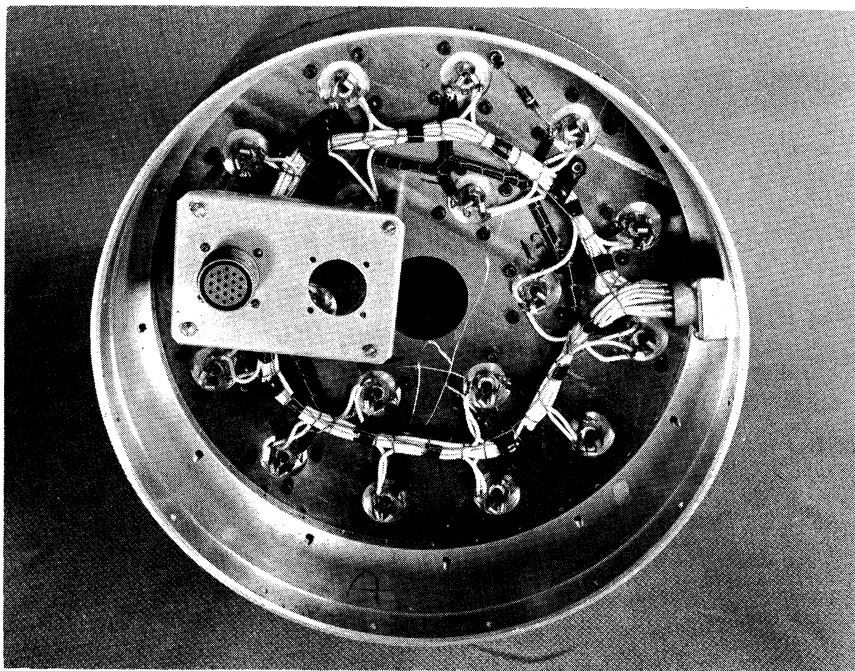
Bottom of grenade section showing grenade squib wiring.
